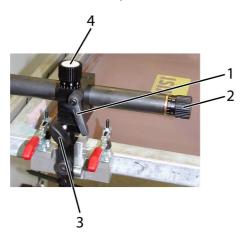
Example of rotary knob with clamping lever, screen holder
